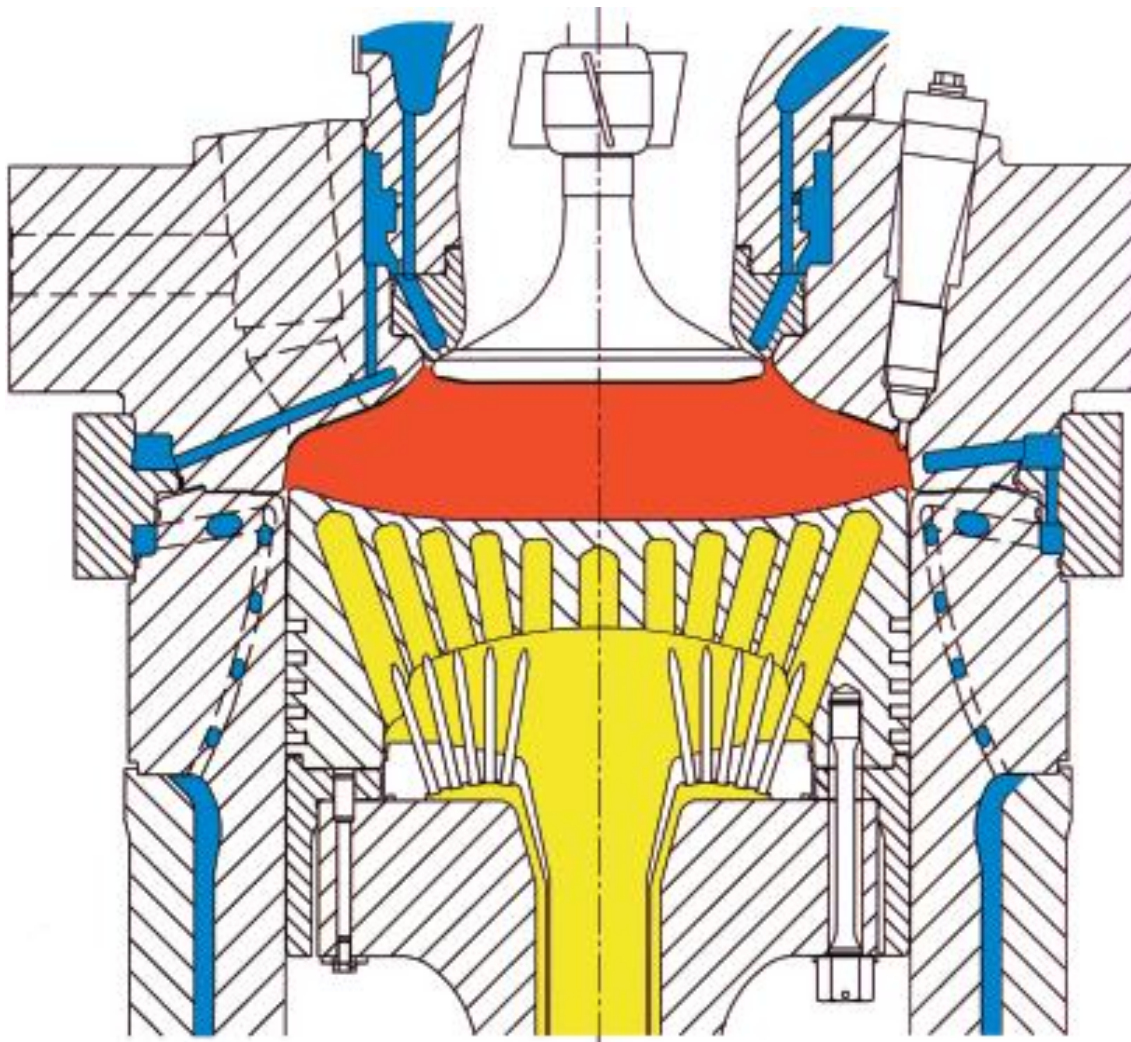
Engine cross section detailing piston design (Doug, 2009)
